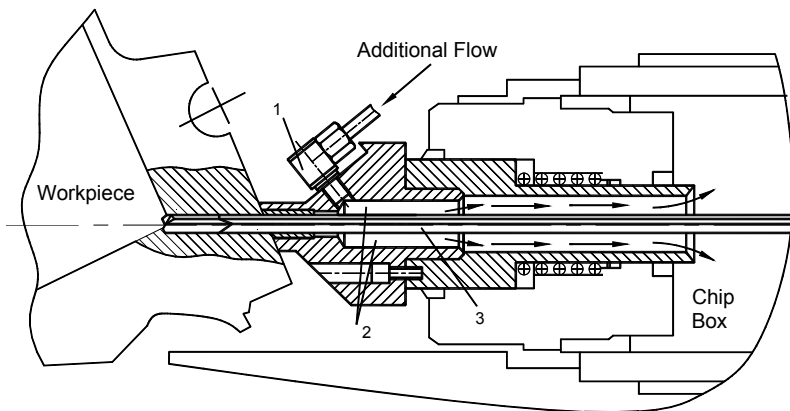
Typical design of the chip removal passage used in production line machines in the automotive industry
